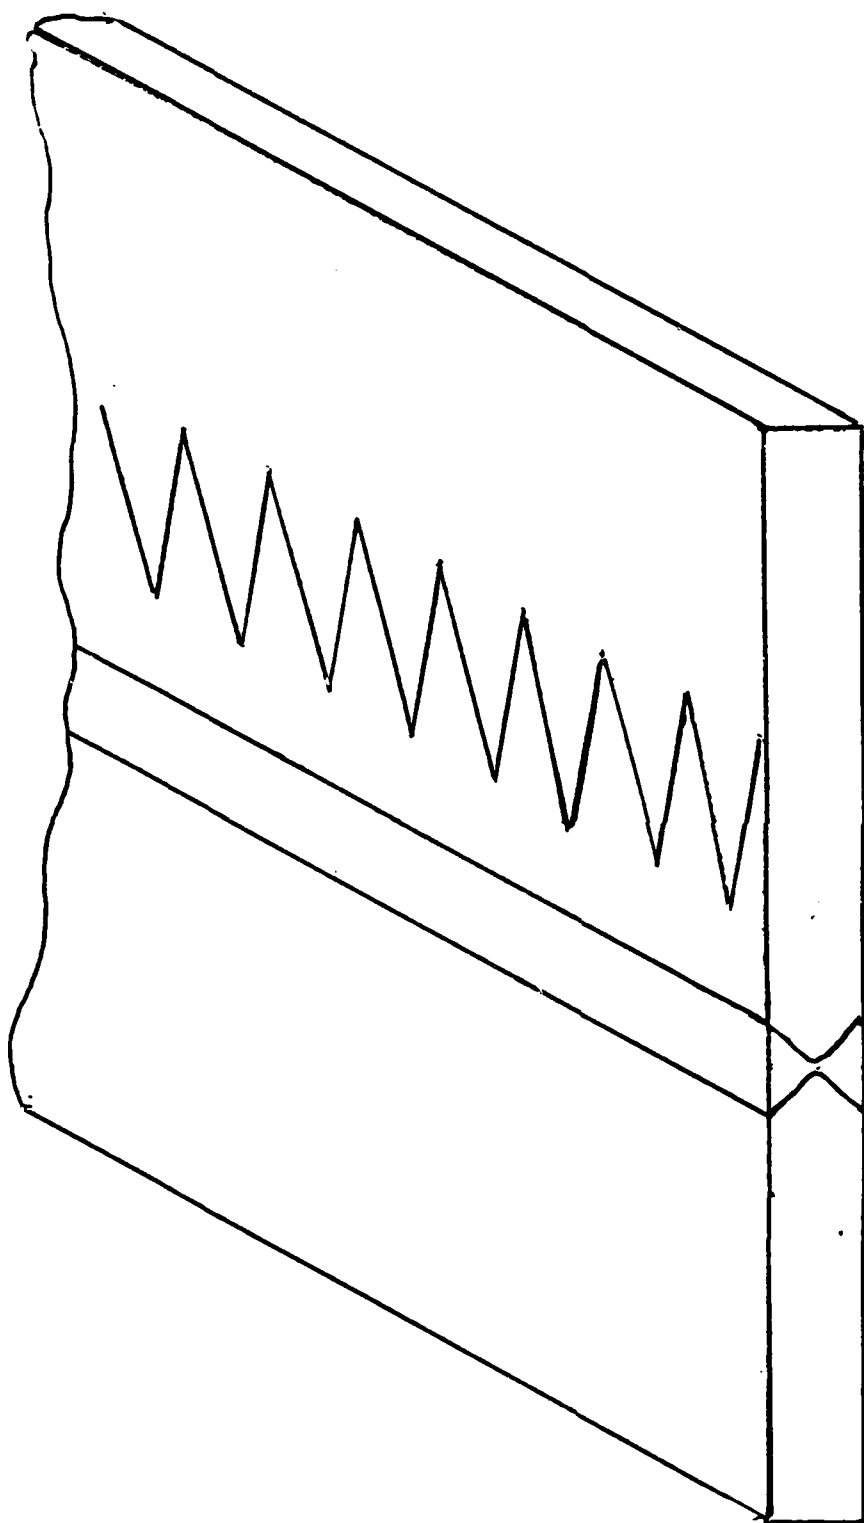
Saw Cut Scan Pattern of Weld Inspection Using a Contact
